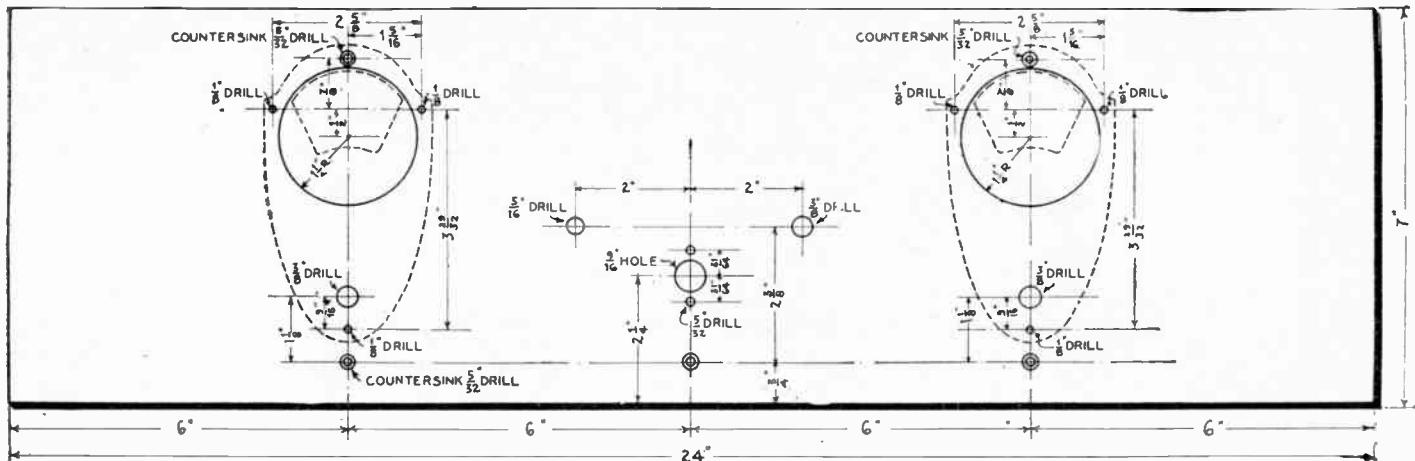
This drilling layout shows the exact position of all holes in the front panel required for mounting the tuning controls of the set with the apparatus originally used.
